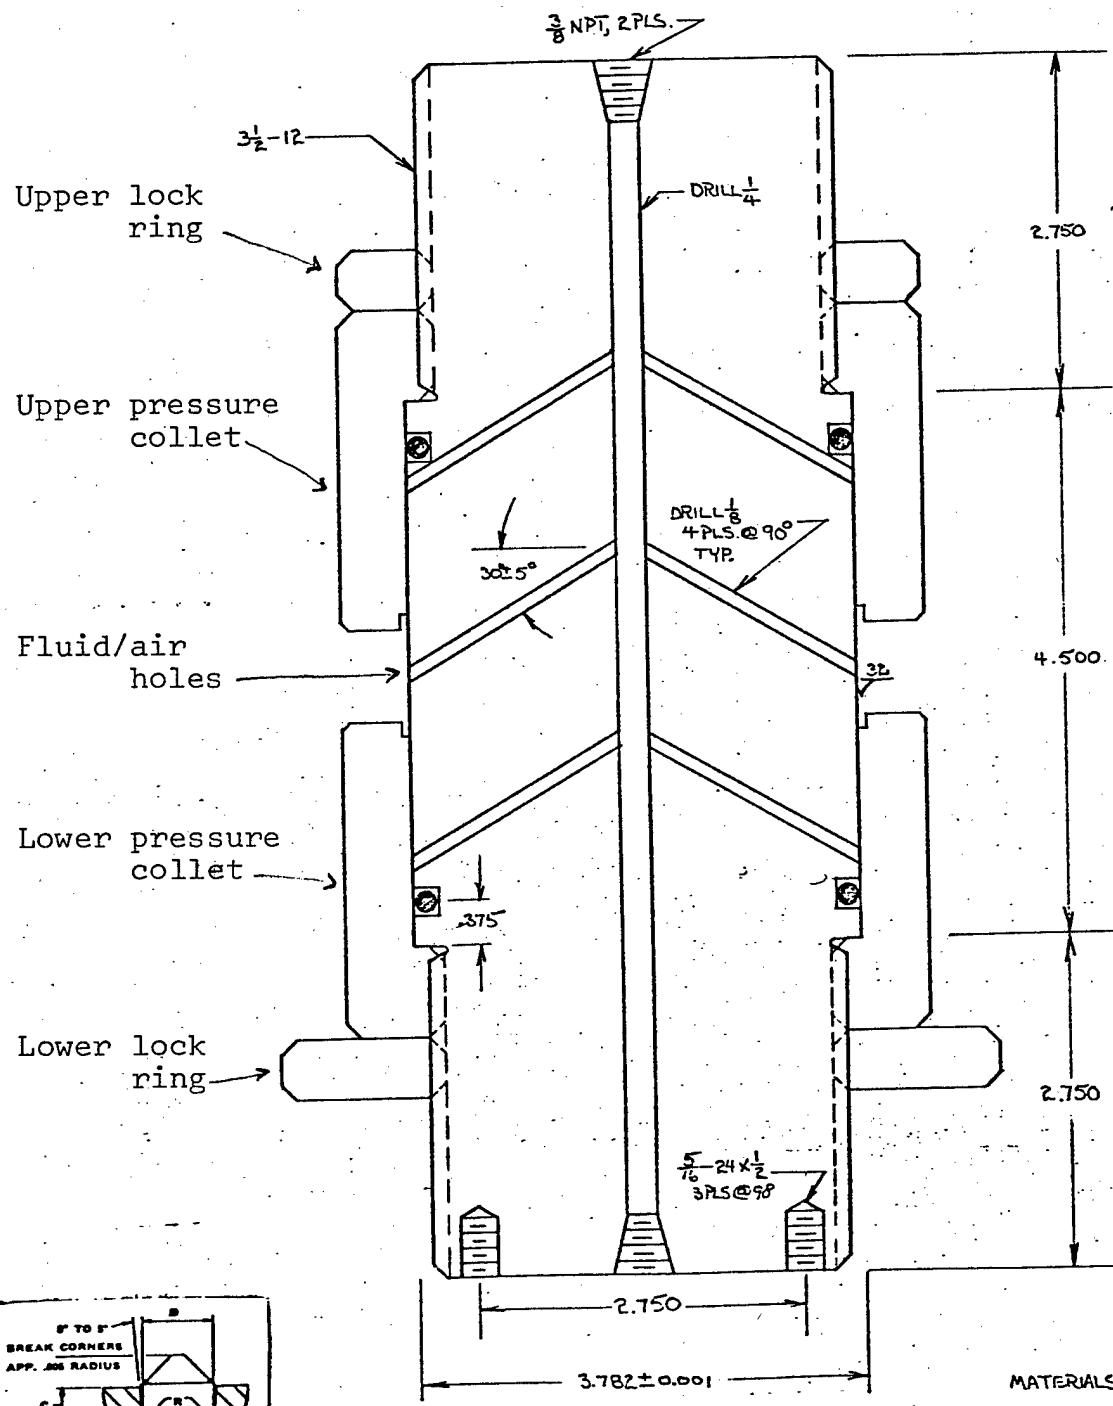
Dimensioned Drawing of Internal Pressure Only Fixture
